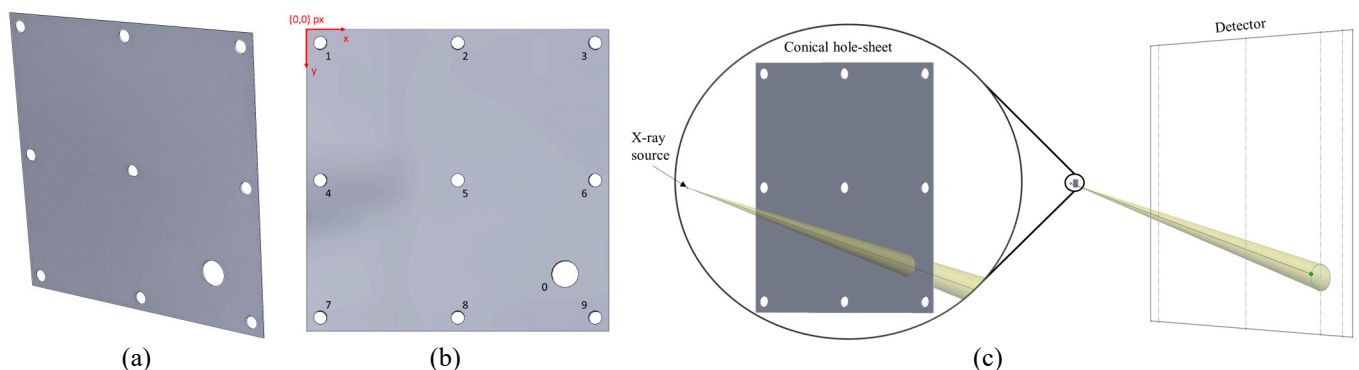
(a) Isometric view, and (b) front view of the conical hole sheet standard; and (c) illustration of how the distorted hole-like structures were constructed
